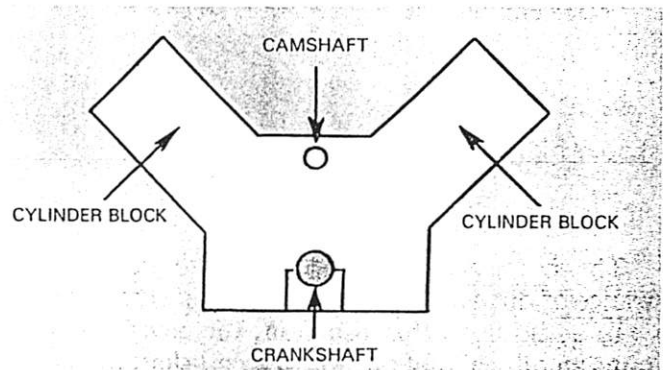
Camshaft location in a cam-in-block or valve-in-head (OHV) V-type engine.
